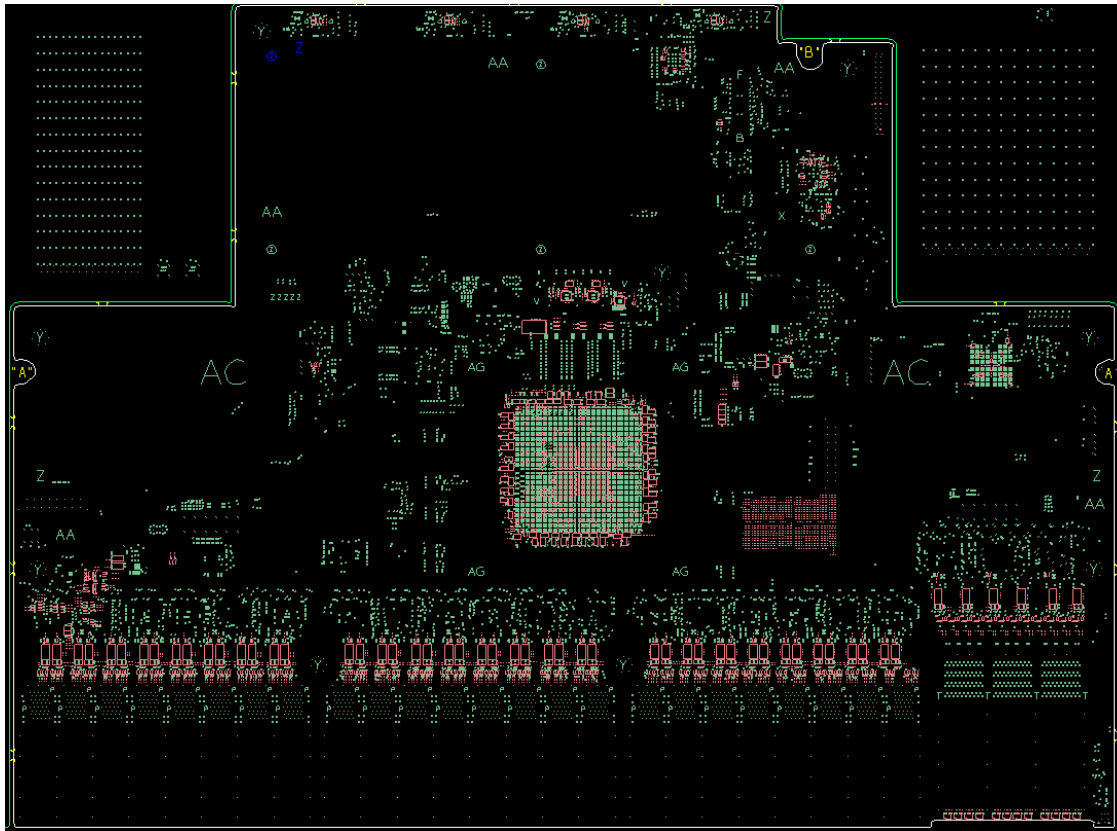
Inventec DCS6072QS Switch PCB Bottom View
